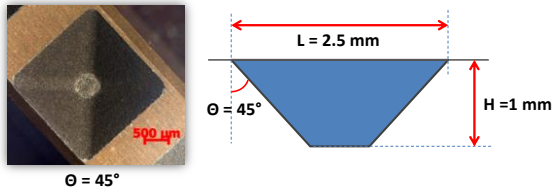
A machined sloped pocket (left) and a sketch identifying the geometrical parameters (right).
